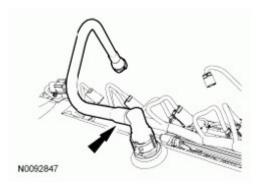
Identifying Crankcase Ventilation Tube Courtesy of FORD MOTOR CO.
